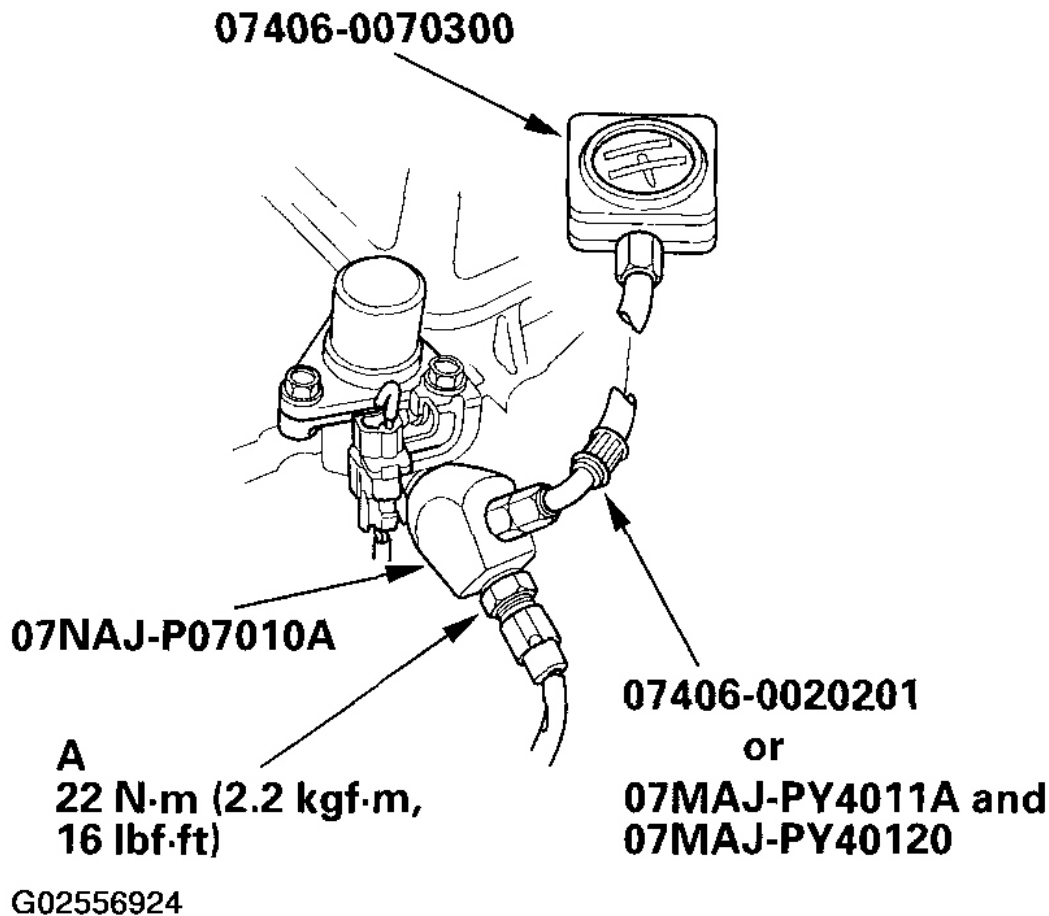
Removing VTEC Oil Pressure Switch & Installing Special Tools
